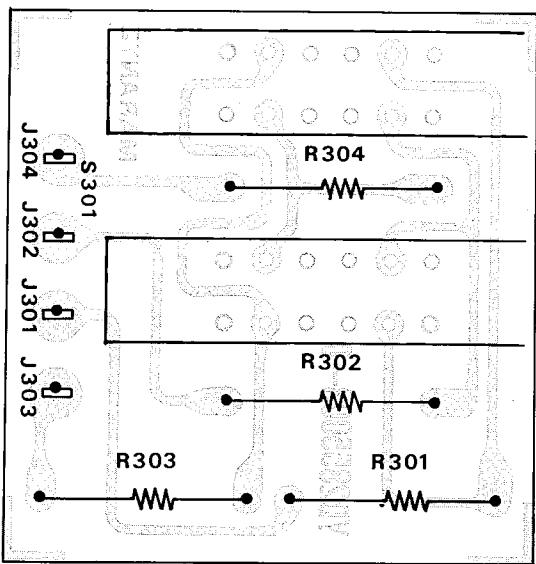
Main-Remote Speaker Switch Unit Assembly P300 Component Locations
